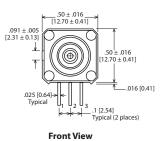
SHA12: Concentric Shafts, Solder Hooks, 2 Potentiometer(s) or RS + MP, 3/8" Bushing
